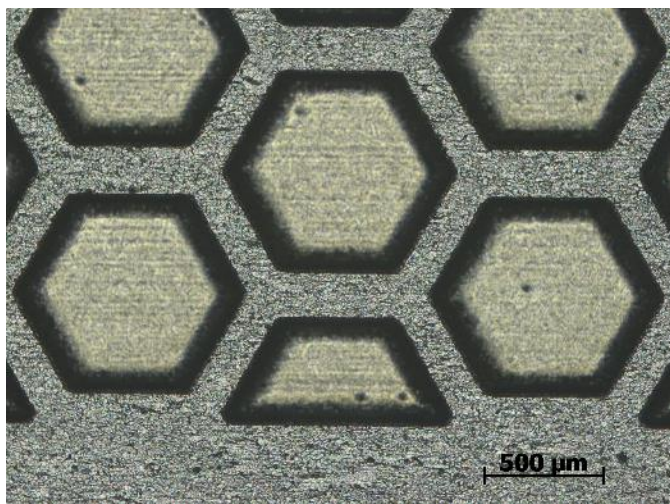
Honeycomb pattern machined on a stainless steel plate AISI 304 by means of a synchronized galvanometric scanner
